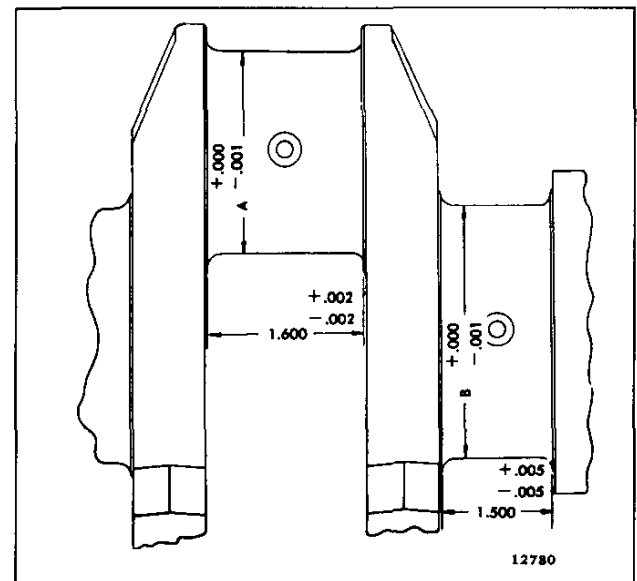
Dimensions of Crankshaft Journals - In-Line Engine
